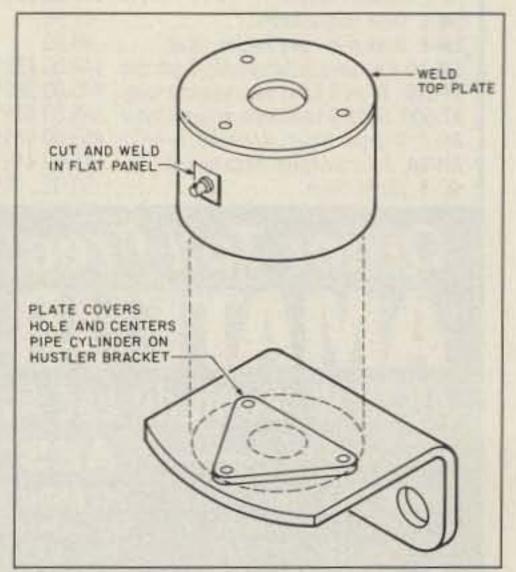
Lower plate covers hole in bracket and aids in centering the enclosure cylinder.
